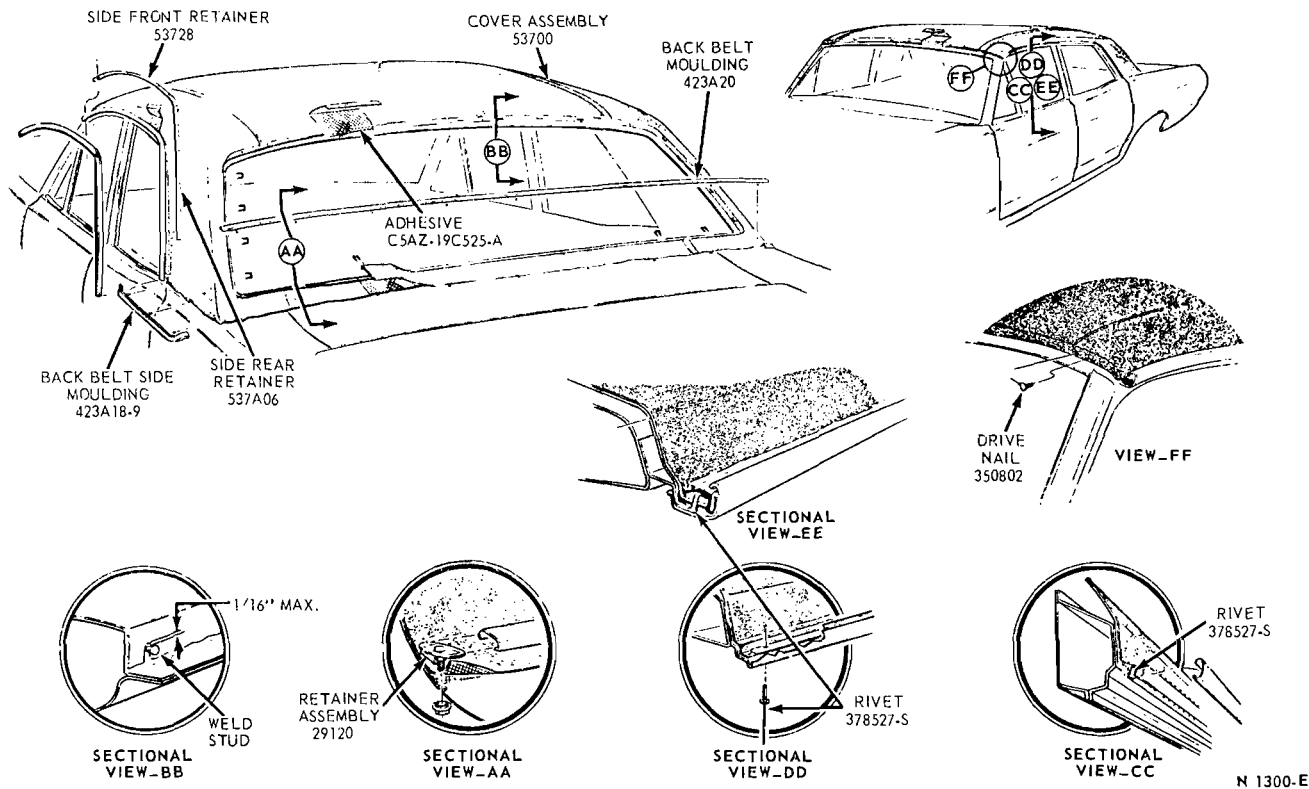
Typical Roof Outside Cover Installation—Mercury Intermediate, Falcon, Fairlane
